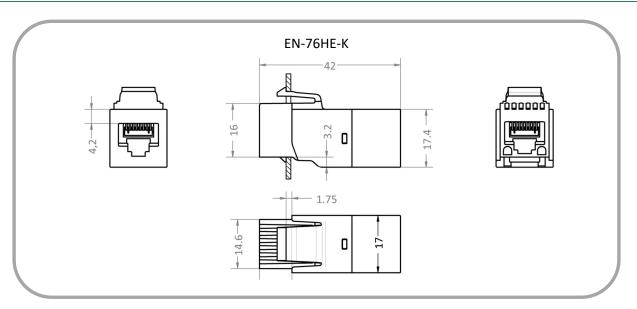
Technical drawings for EN-76HE-K. All dimensions are in millimetres.
